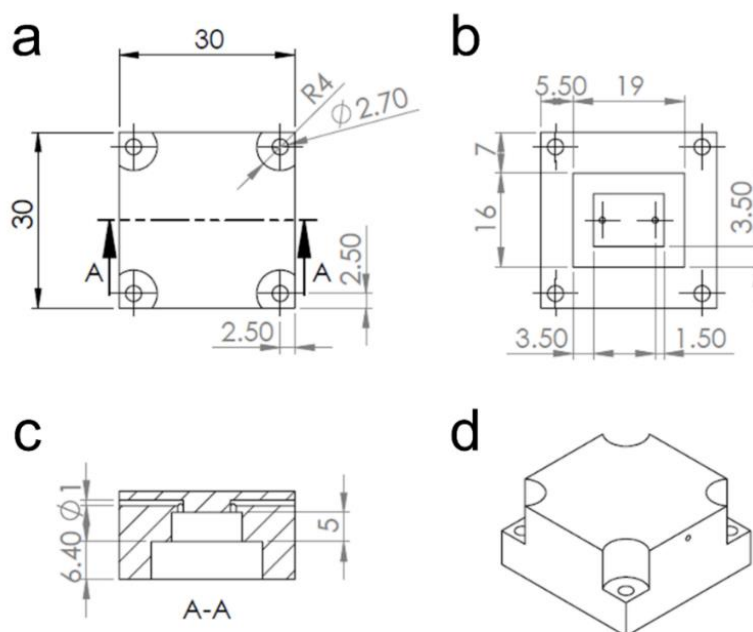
CAD drawing of the in-house designed Teflon sensing chamber. Shown are (a) top view, (b) bottom view, (c) cross-sectional view and (d) 3D view of the chamber with the most important dimensions in mm.
